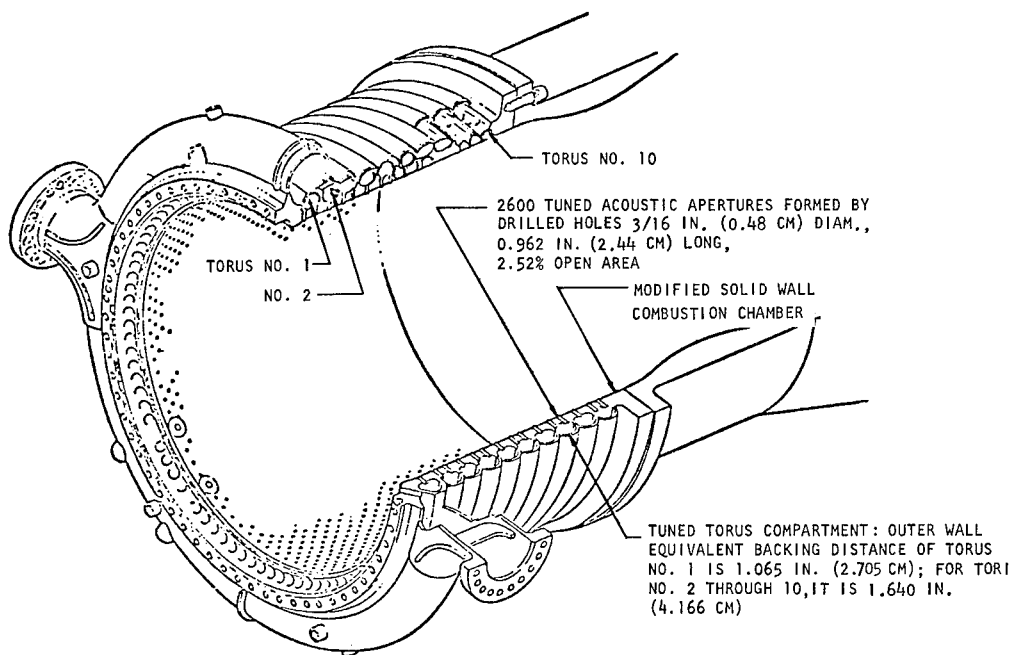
Acoustic liner design for F-1 engine (ref. 49).
